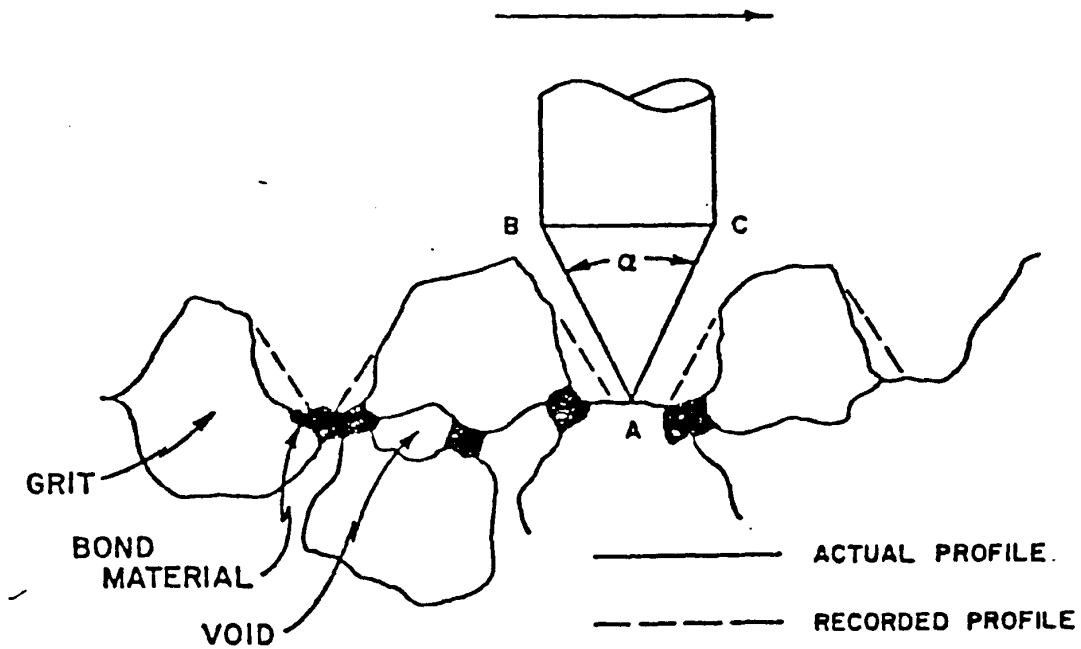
Induced distortion produced by the conventional profile measuring technique on grinding wheel cross section (after Deutsch, Wu, and Stralkowski)
